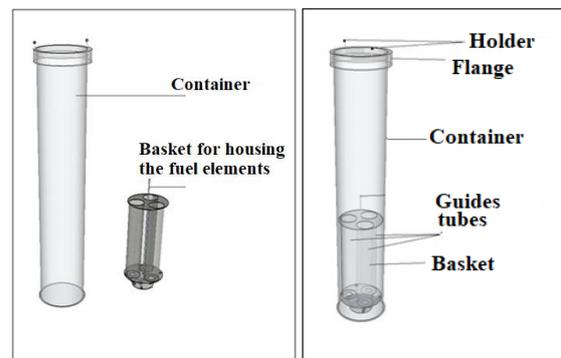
Simplified schematic of the sipping apparatus: a) sipping container and basket; b) sipping basket inside the container.
